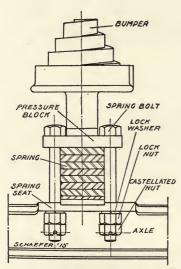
Nash Quad Spring Mounting and Spring Bumper.
